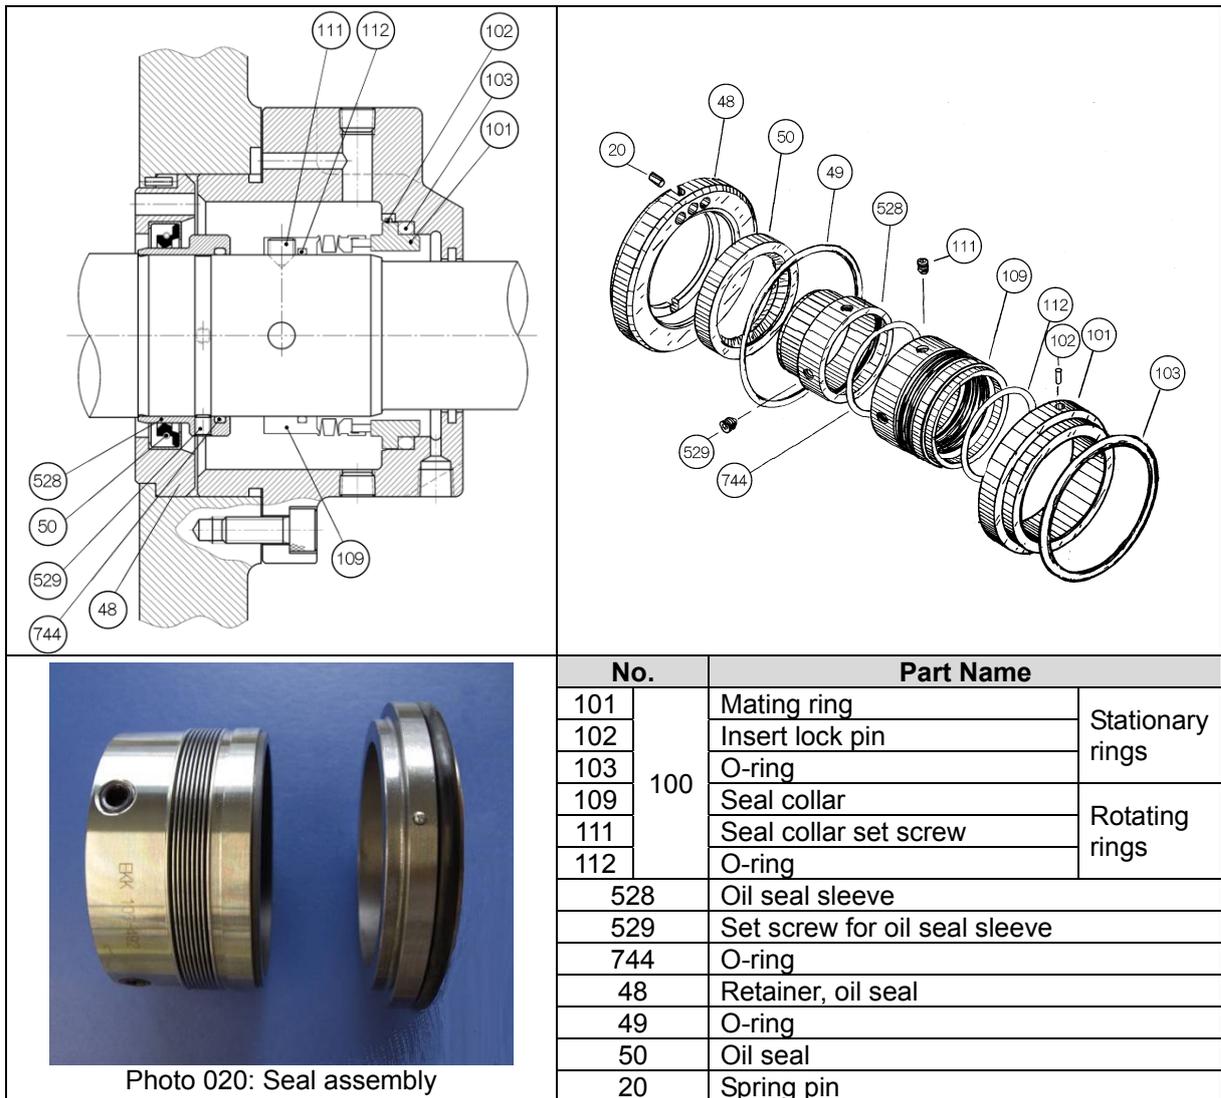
Development View of BBSE-type Mechanical Seal Assembly and Related Parts
